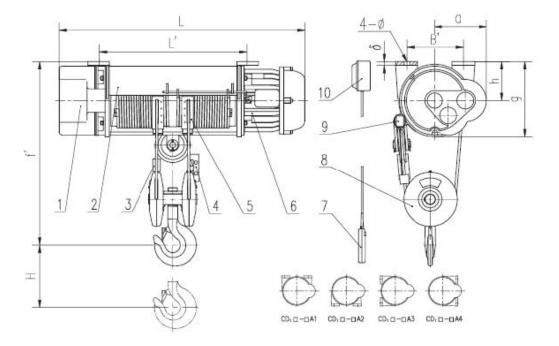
Outline Structure Drawing for PWMDF3T24M – PWMDF5T24M Fixed hoist
